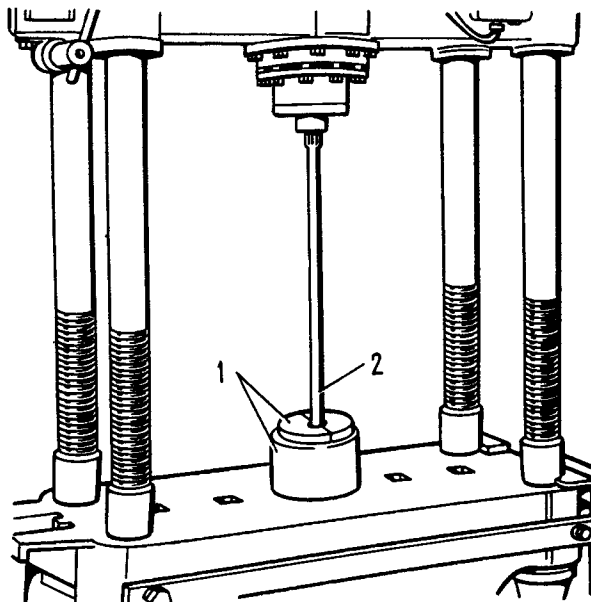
Pressing Out Axle-Shaft Bearing Lockring:
